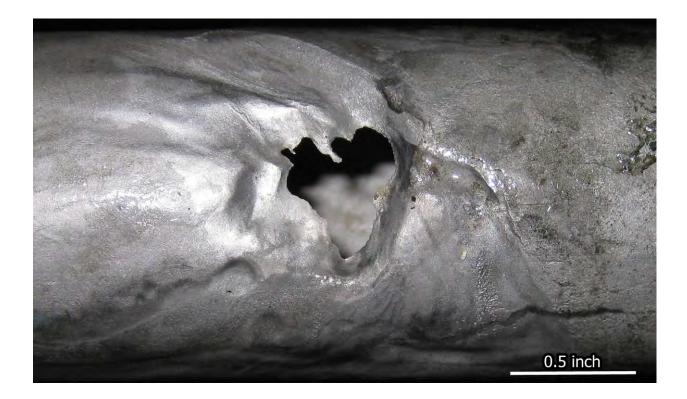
The large hole eroded from the outside-in on the oleum sample line²⁶
